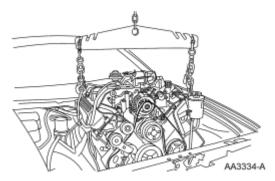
Lifting Engine Assembly Courtesy of FORD MOTOR CO.
